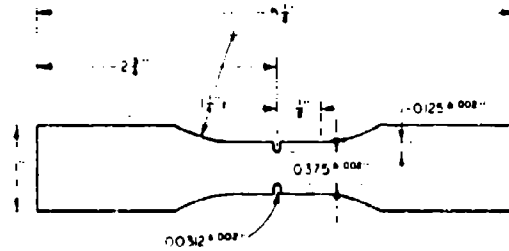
NOTCHED SHEET FATIGUE SPECIMEN
